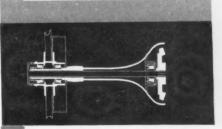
Wheel is mounted on outside of housing on two bearings in full-floating axles. The axle shaft serves only to turn the wheel
